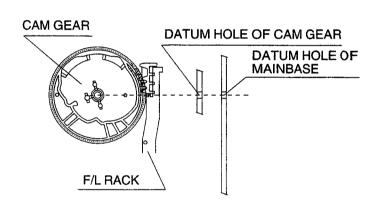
ASSEMBLY OF THE CAM GEAR & RELAY LEVER
